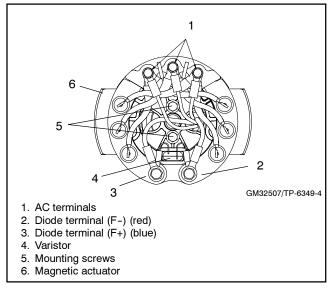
Rotating Rectifier Assembly Hub and Components
